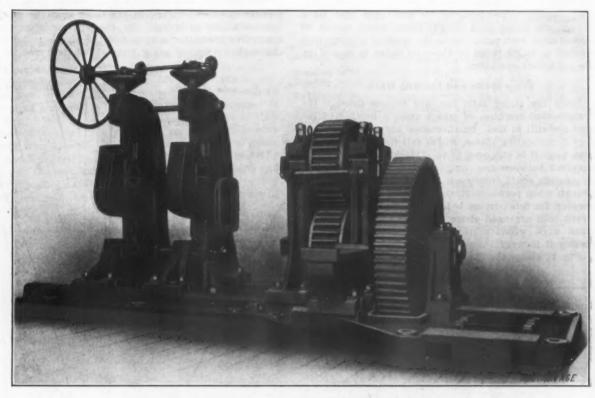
Welding Rolls, Top Roll Bulanced, 24-Inch Pipe.
